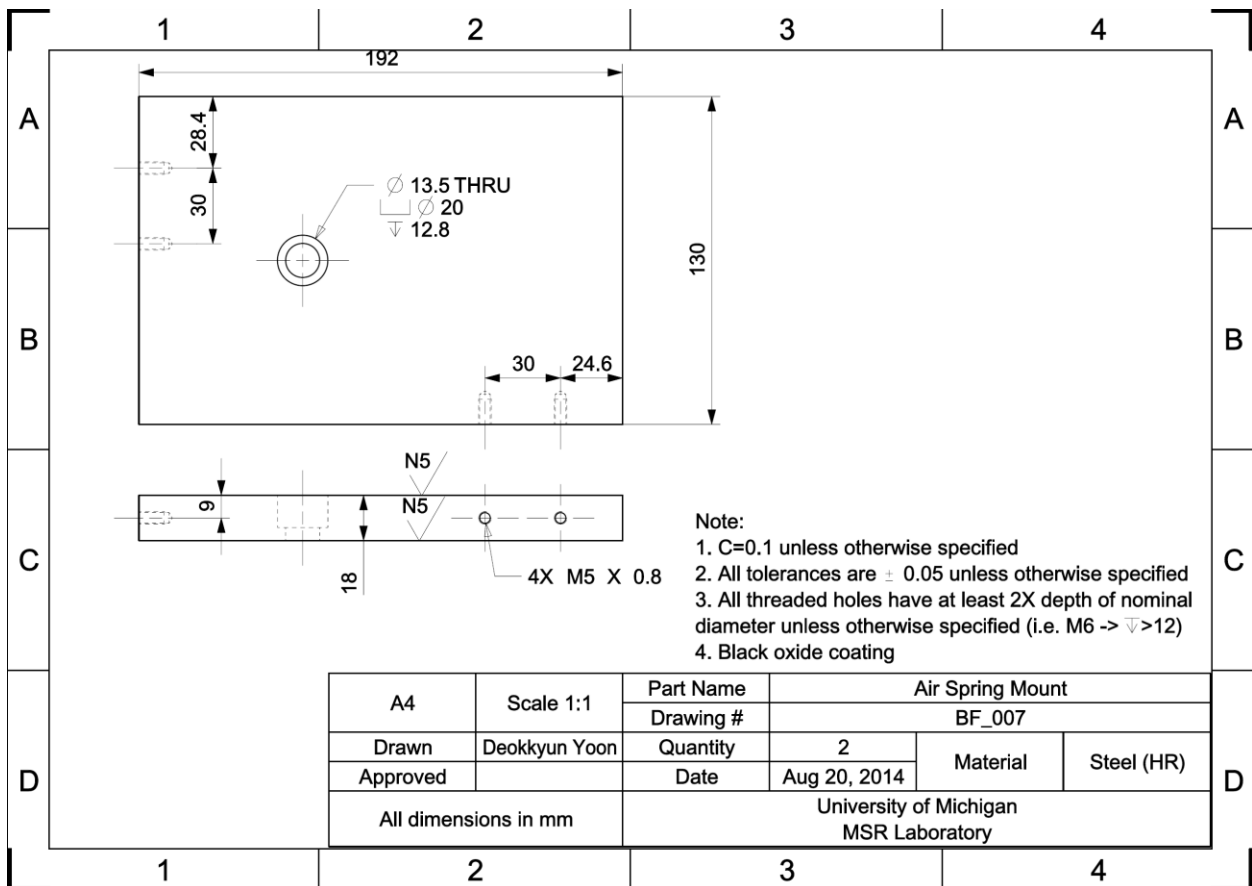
Manufacturing drawing of Air Spring Mount #1.
